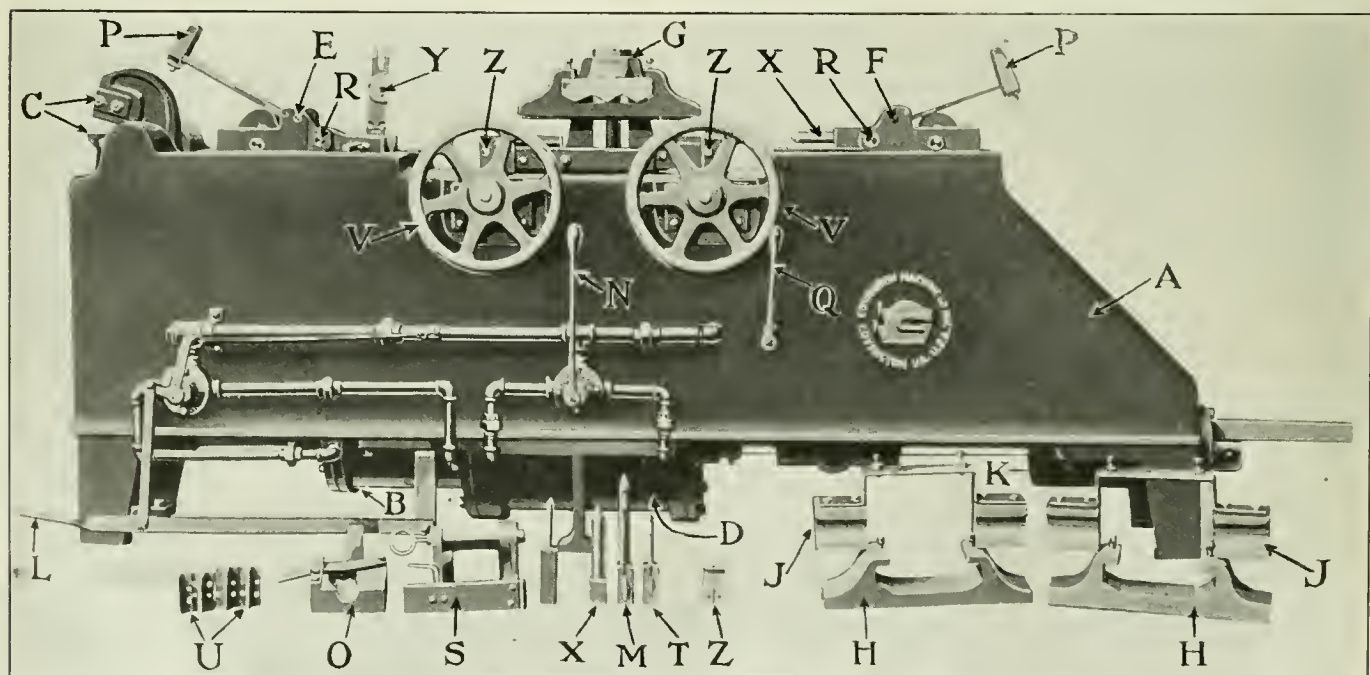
General View of Covington Machine for Dismantling and Assembling Air, Signal and Steam Hose
